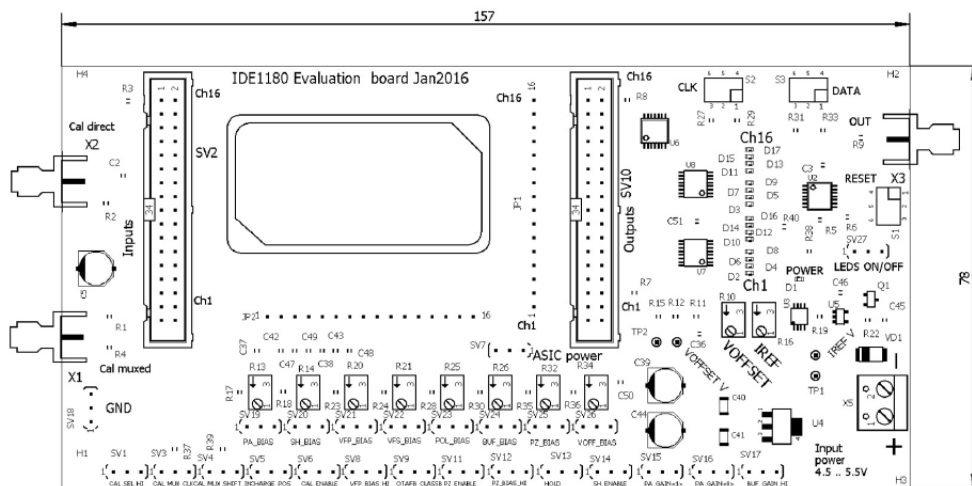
Drawing of the Amadeus Chip evaluation board.
